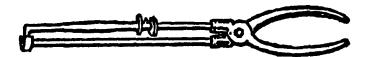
Glasscutter, gage-glass, two-beam, plier handle.
